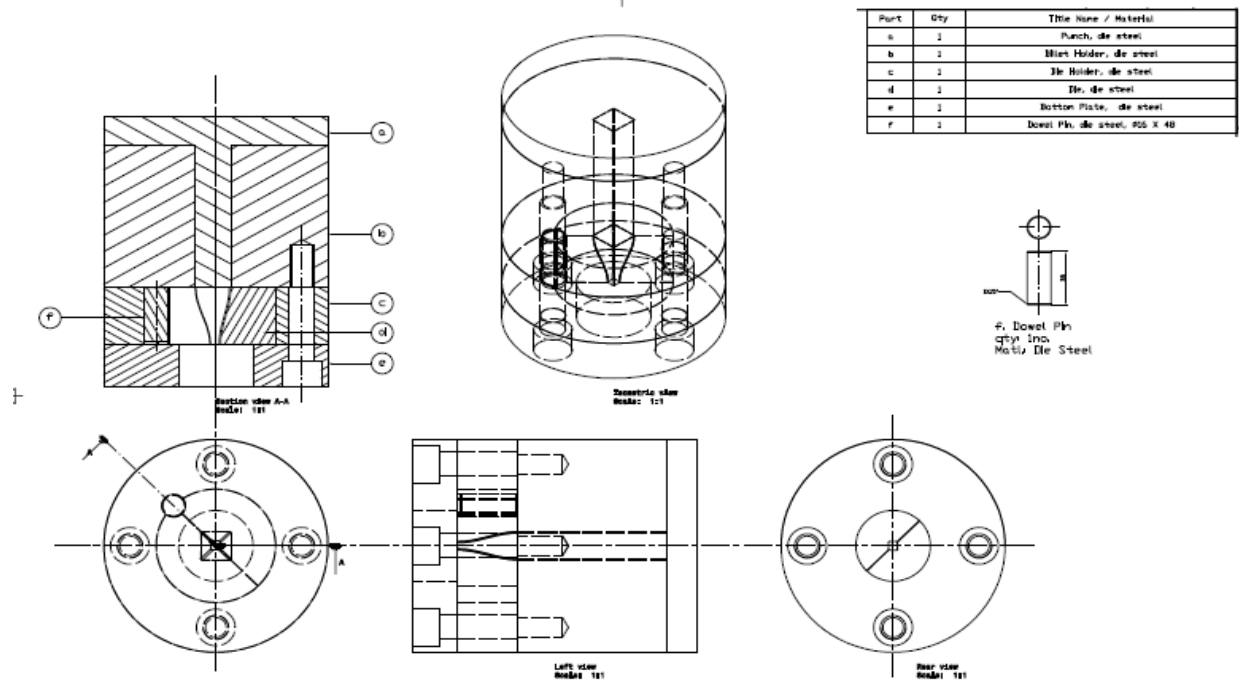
Cosine Die Assembly with Experimental set-up
